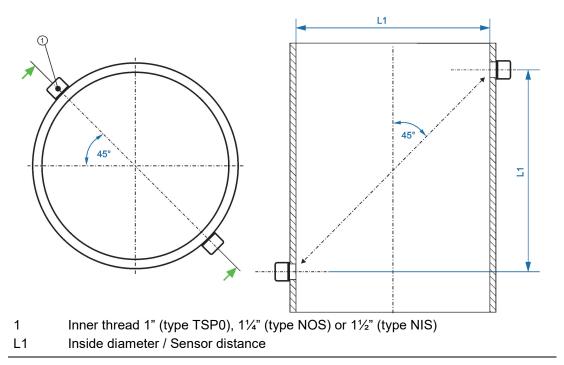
Example of an 1-path measuring in a pipe (sectional view)
